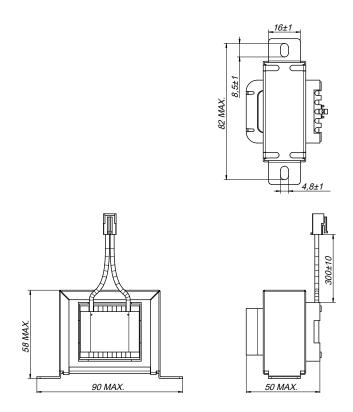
Harmonic inductor dimensions - CF03B01 Version
